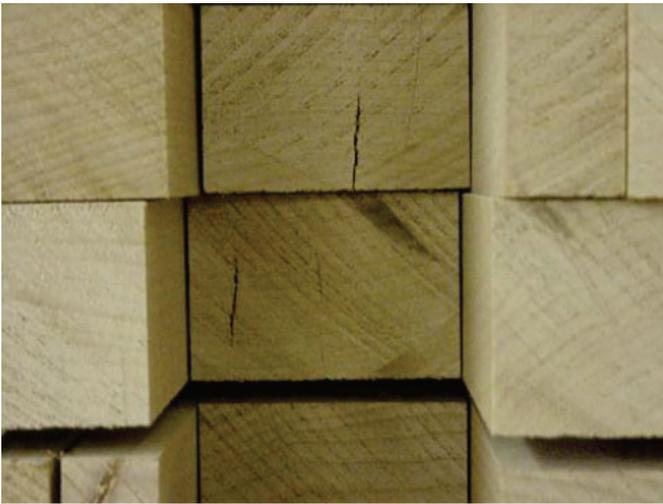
Red alder dimension parts that were not end-trimmed as much as necessary to remove checks. These parts will need to be recut, otherwise they will be rejected further along in the processing sequence.
